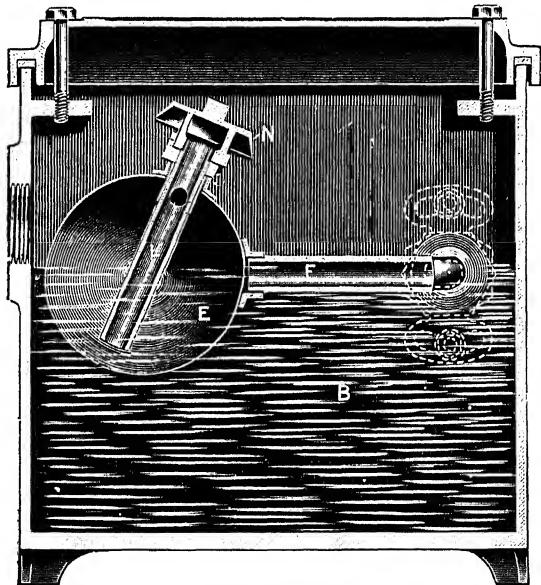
Lancaster Steam Trap : Old Type—Section.
